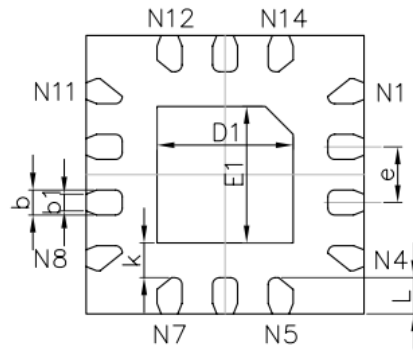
CAN1418R PCB Layout Footprint (Top View)
